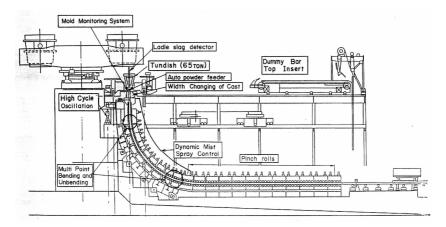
Continuous casting machine layout with tundish being installed between the ladle and mold. [Ref. 2]
